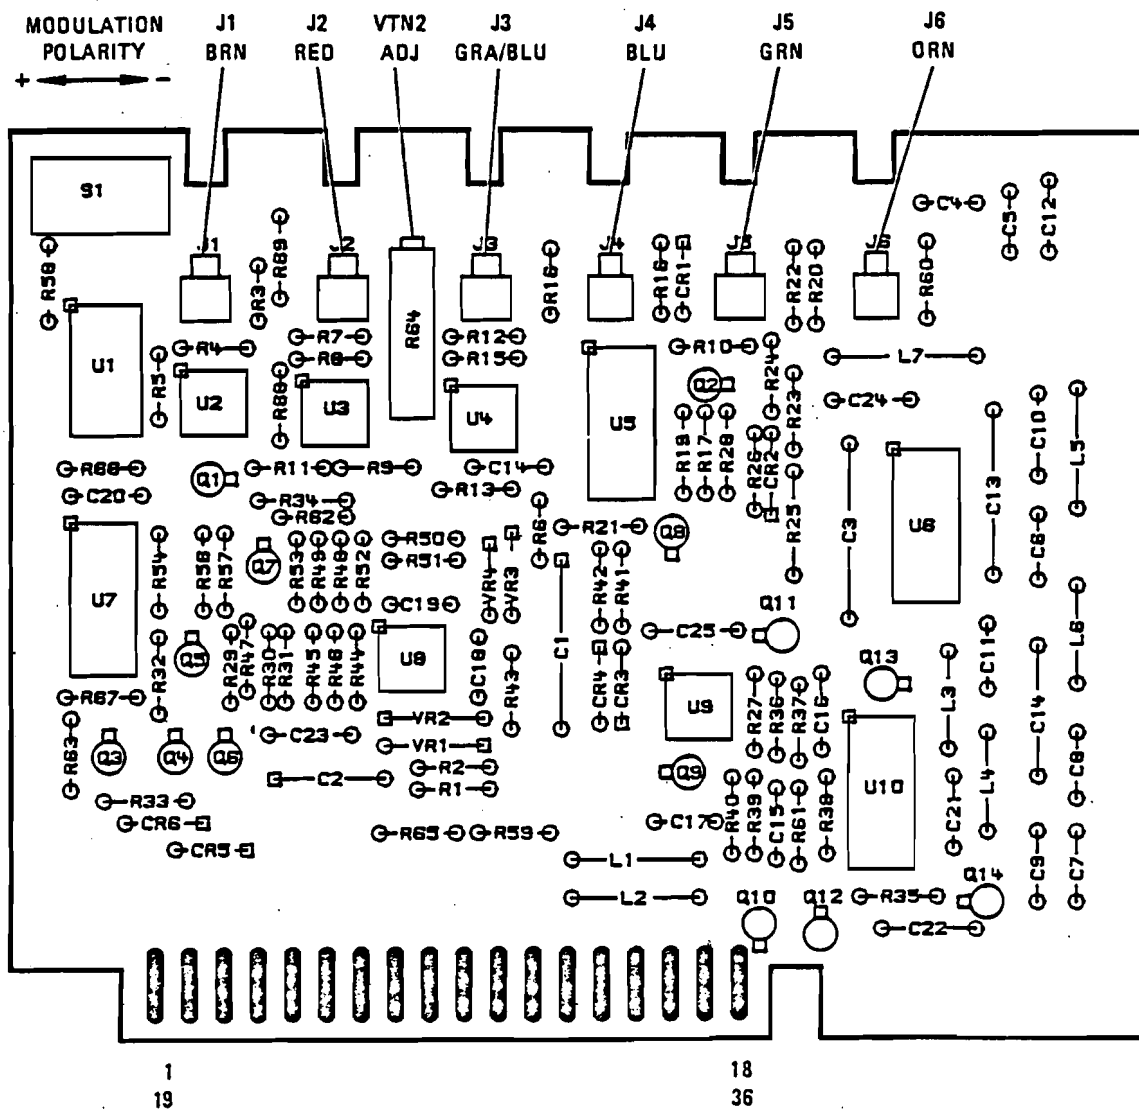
A2A101 Phase Lock Assembly, Parts Locations (Option 005) (CHANGE 1)
